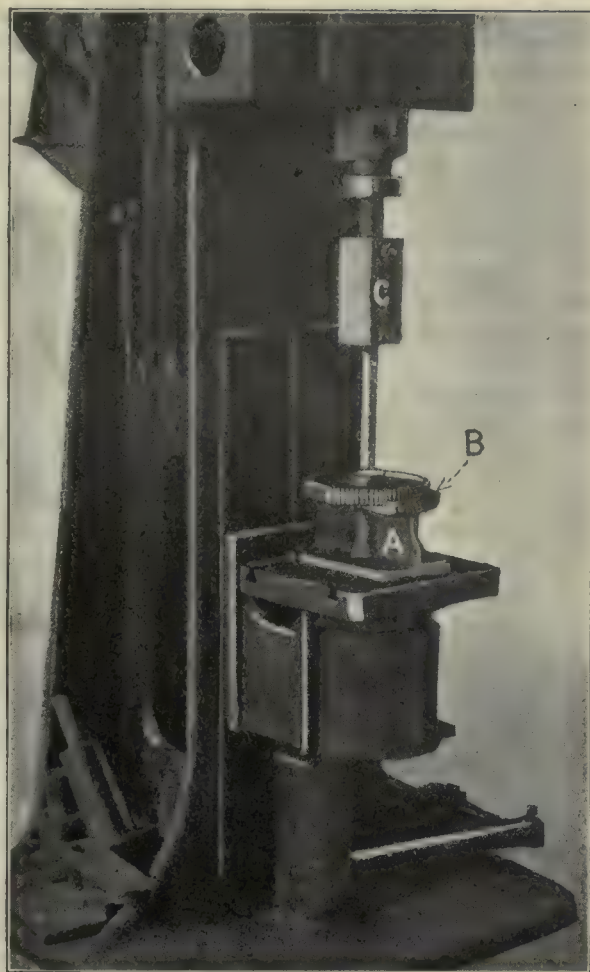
DRIVING THE SHAFT INTO THE LARGE TIMING GEAR
